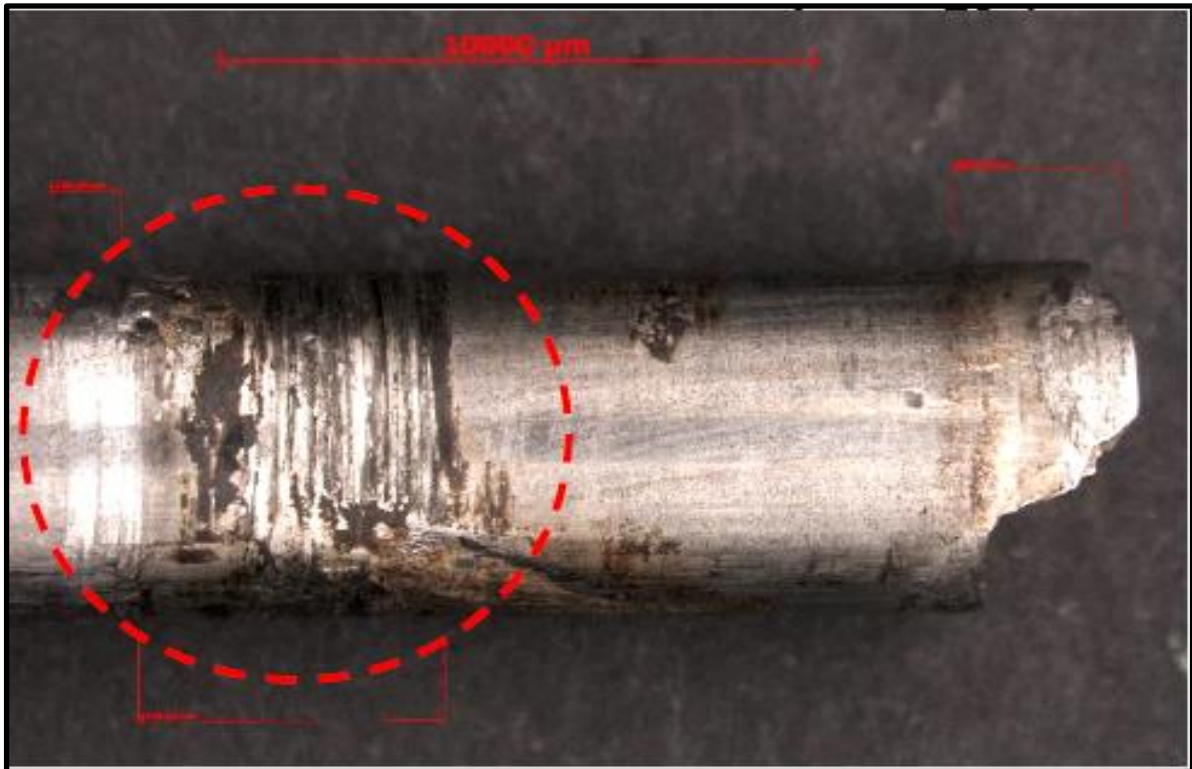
Bolt surface showing rotational damages, fracture end (Stereo).
